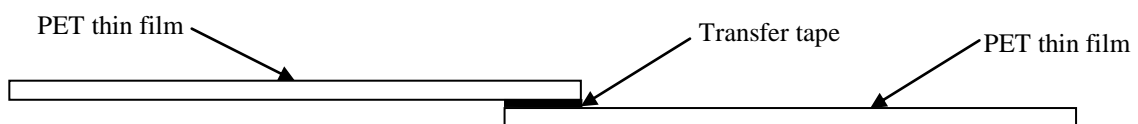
Lap joint used to assemble conical canopy and feed horn
